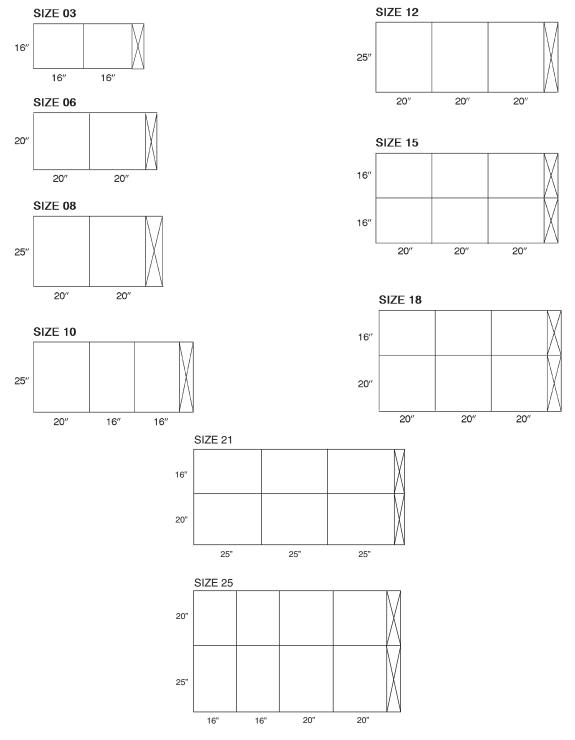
Filter Arrangement, 2-in. and 4-in. Flat
